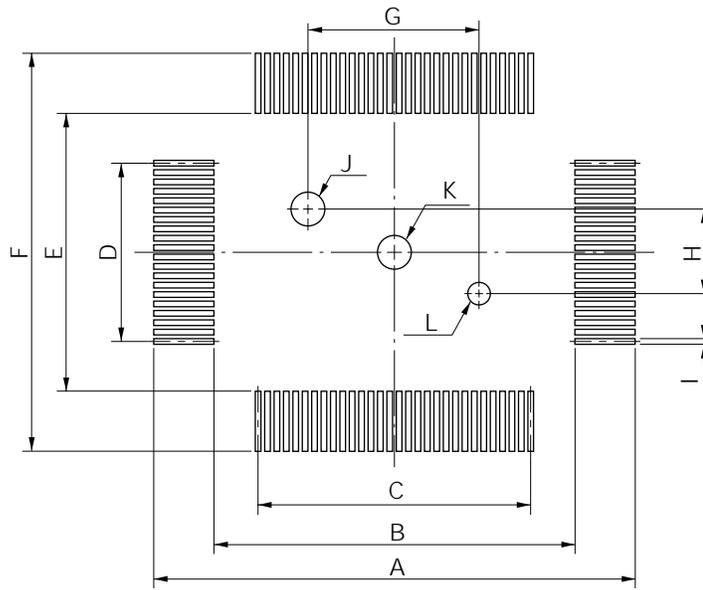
Conversion Socket (EV-9200GF-100) Drawing (For Reference Only)
